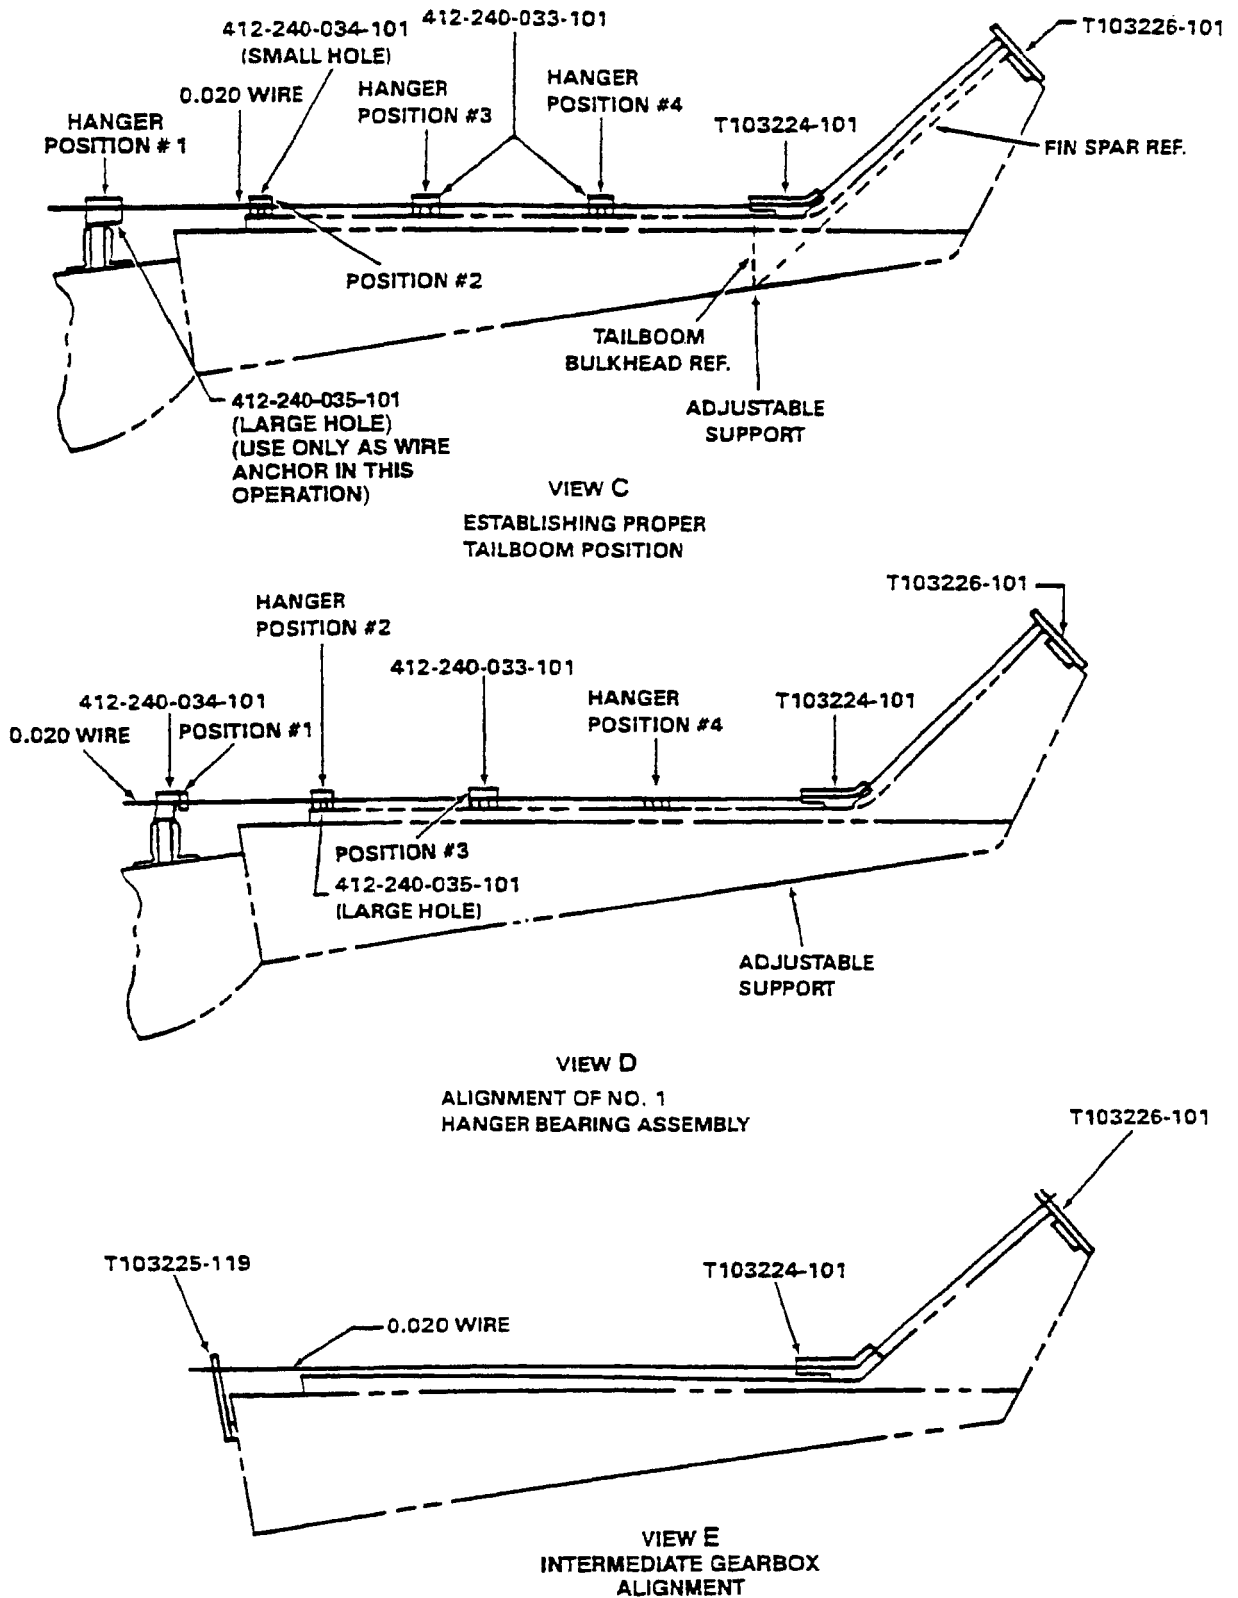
Tail rotor driveshaft alignment (Sheet 1 of 2)
